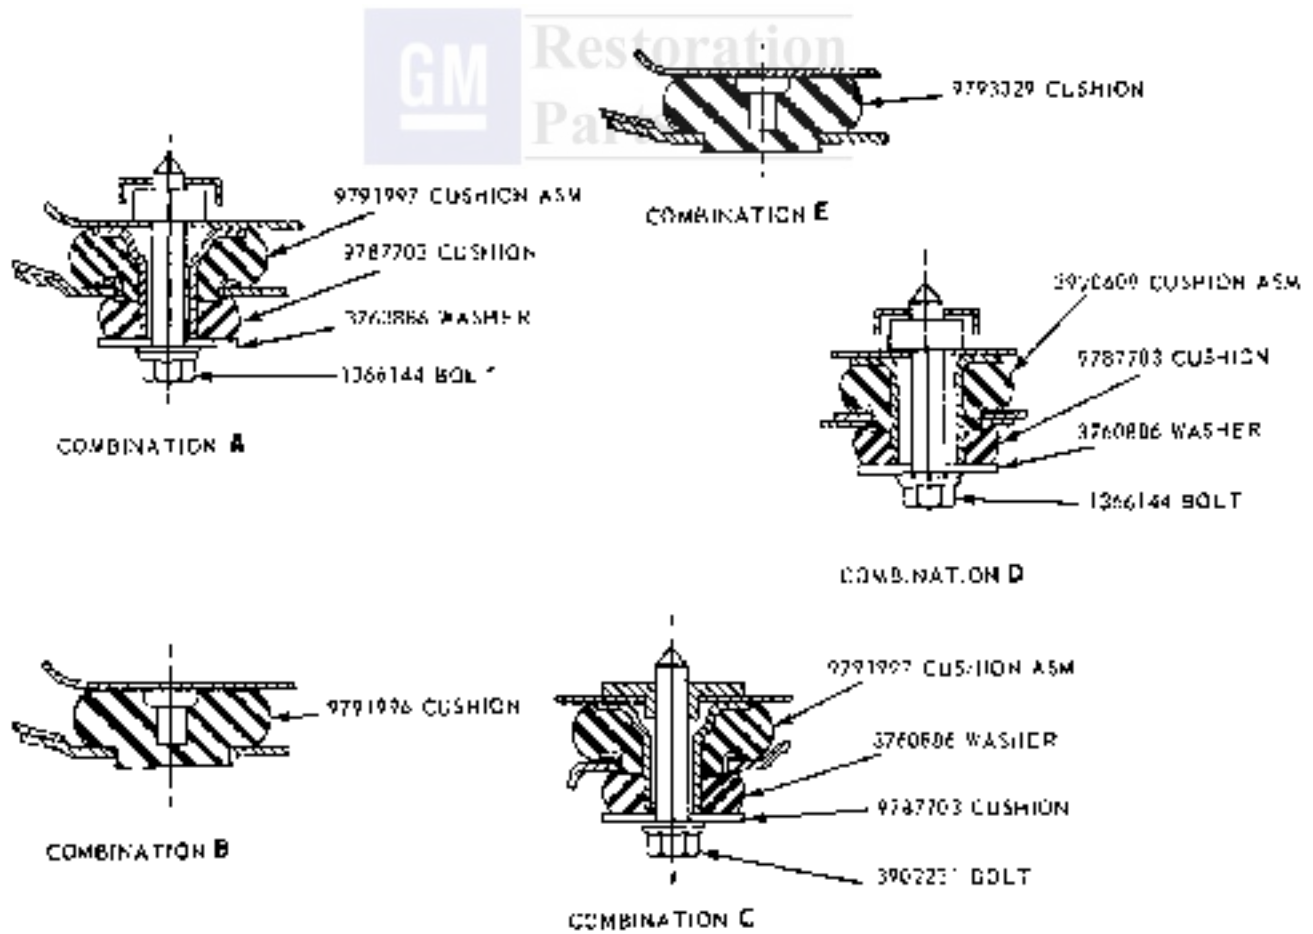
Tempest Body Bolt and Frame Gauge Line Dimensions
